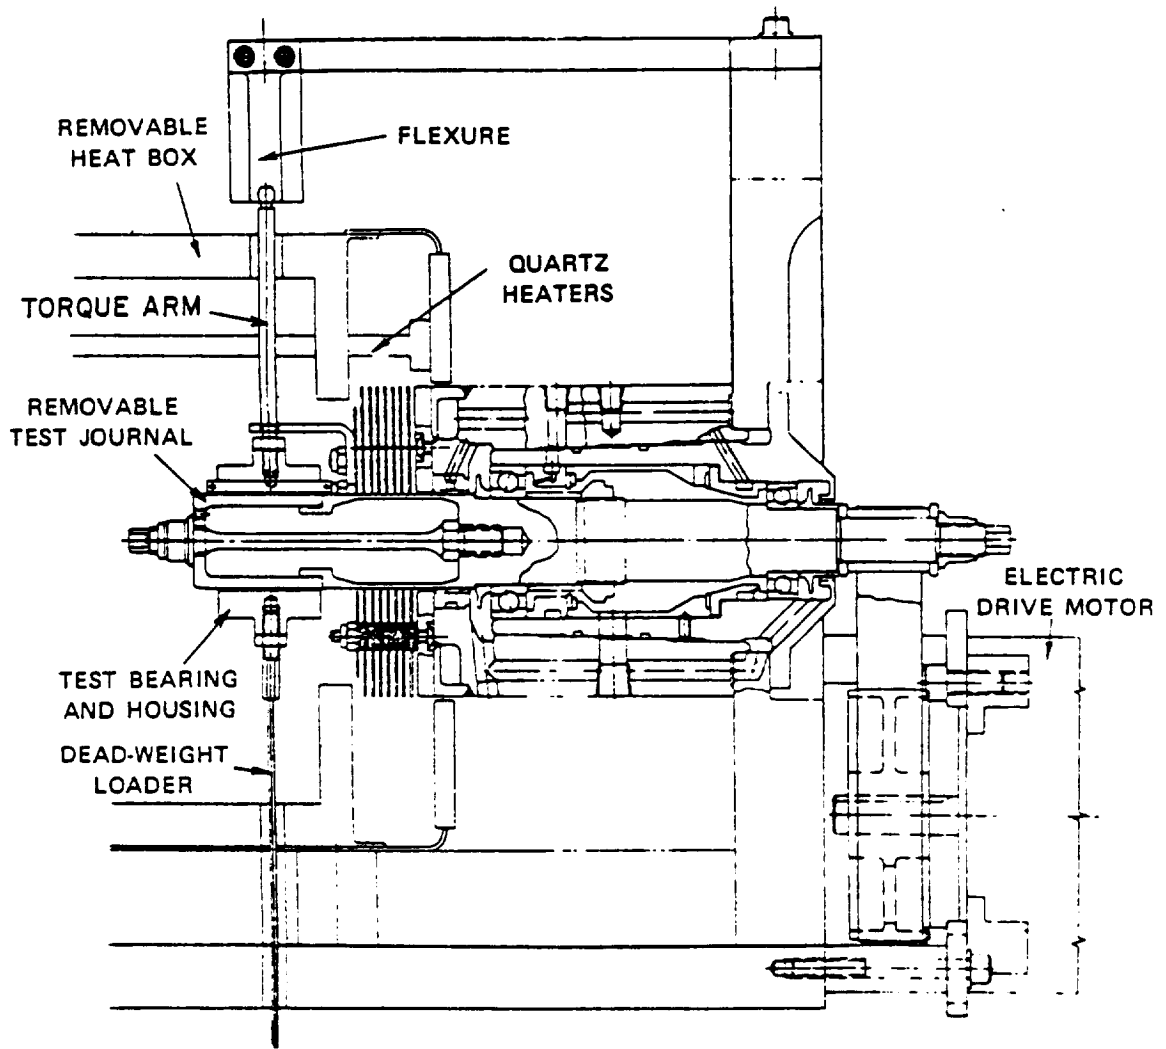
Foil Journal Bearing Materials Test Rig
